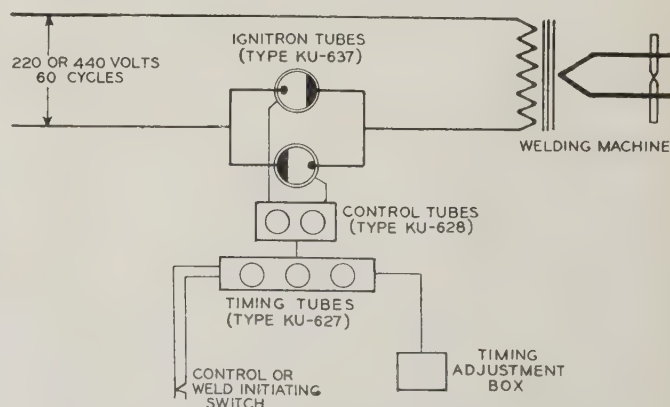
Schematic diagram of the principal parts of the ignitron welding timer
